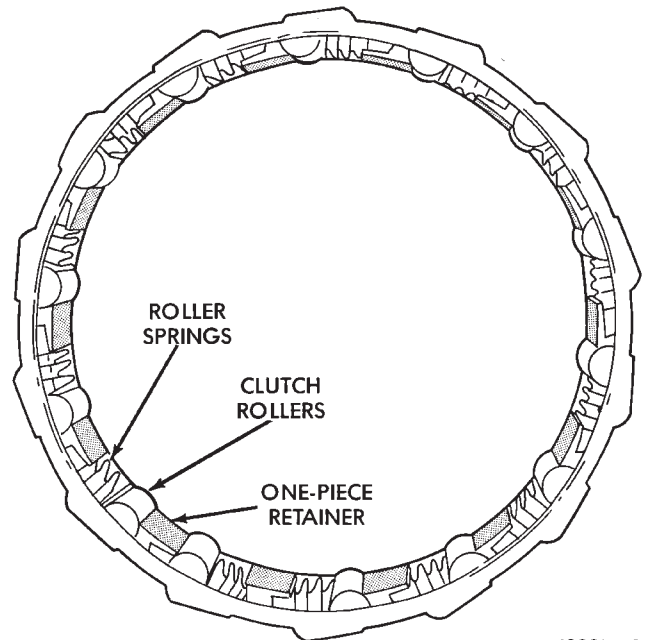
Clutch Roller, Spring And Retainer Assembly—46RH
